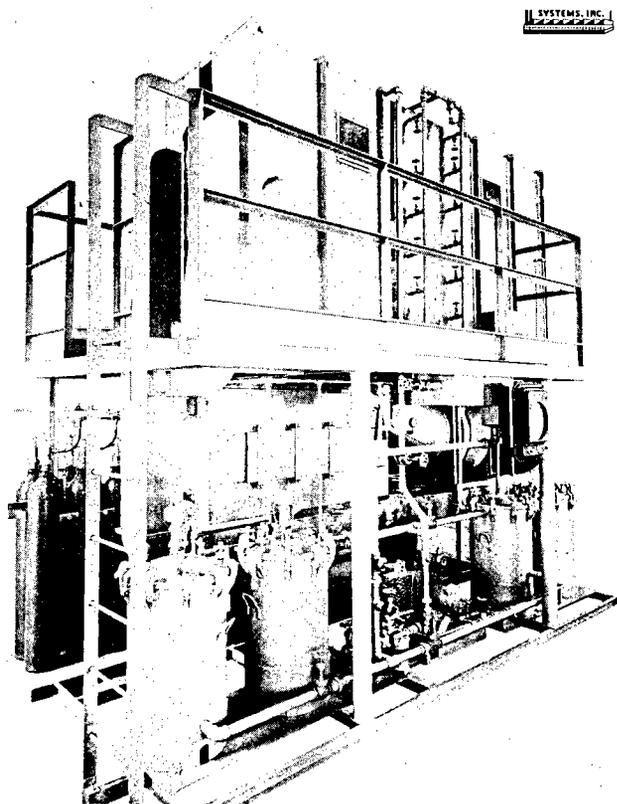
Side view of a flowcoating machine (Industrial Systems, Inc., South Gate, Calif.).
